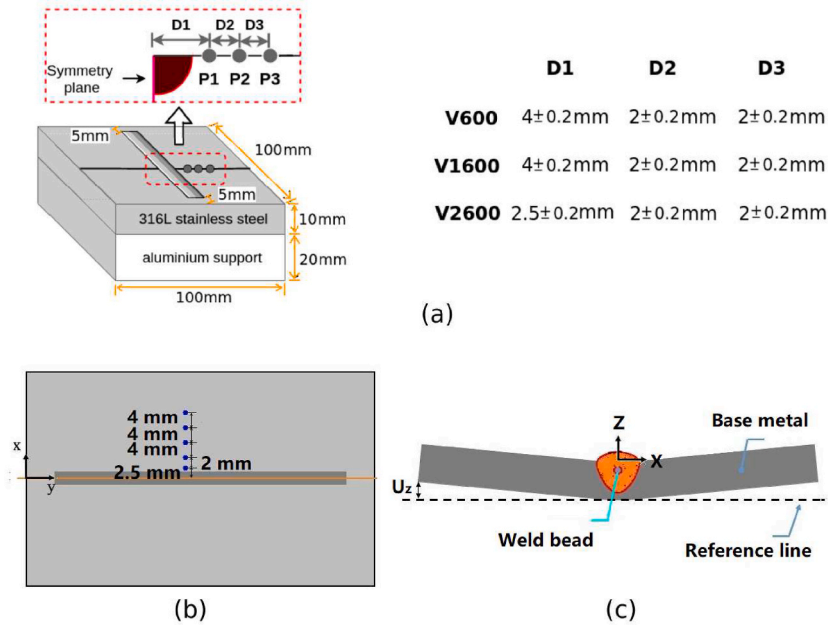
Weld's sketch: (a) Locations of thermocouples; (b) Positions for where residual stress are determined; (c) x-z cross section in the middle of weld's length: measurements of maximum vertical displacement Uz.
